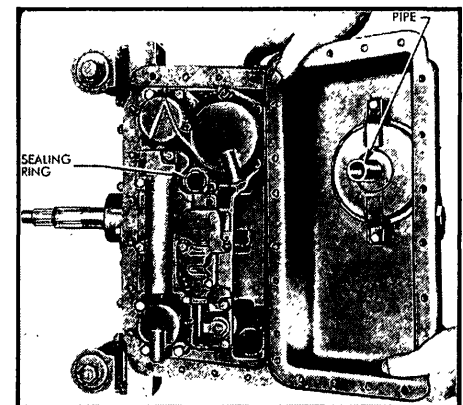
Checking contact of first type oil screen suction pipe with seal
